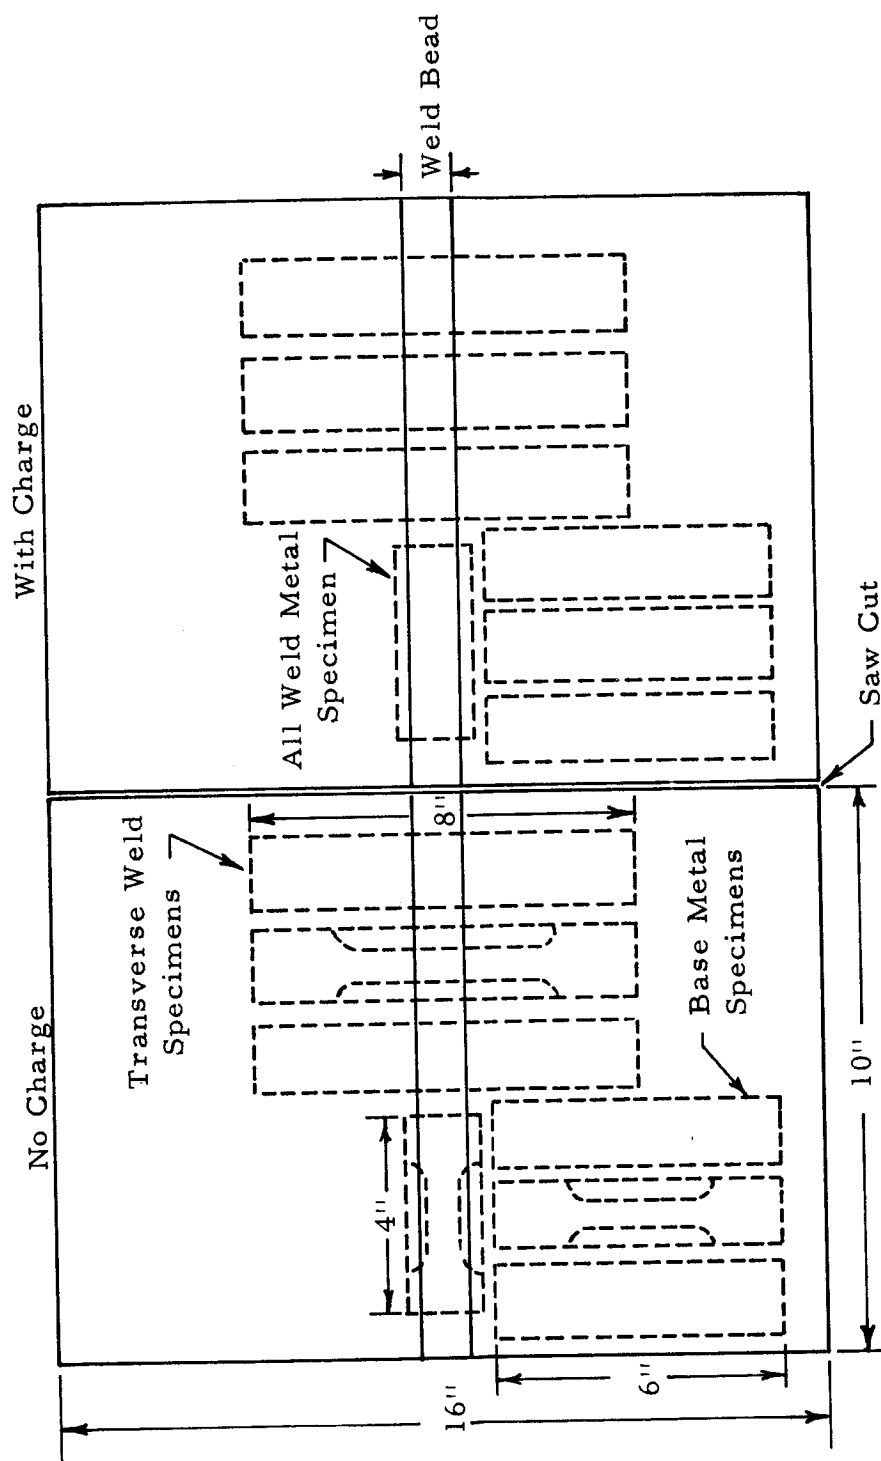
SEQUENCE USED IN REMOVING ALL WELD METAL, TRANSVERSE WELD AND BASE METAL TENSILE SPECIMENS FROM 3/4 INCH THICK 2219-T87 BUTT WELDED PANELS
